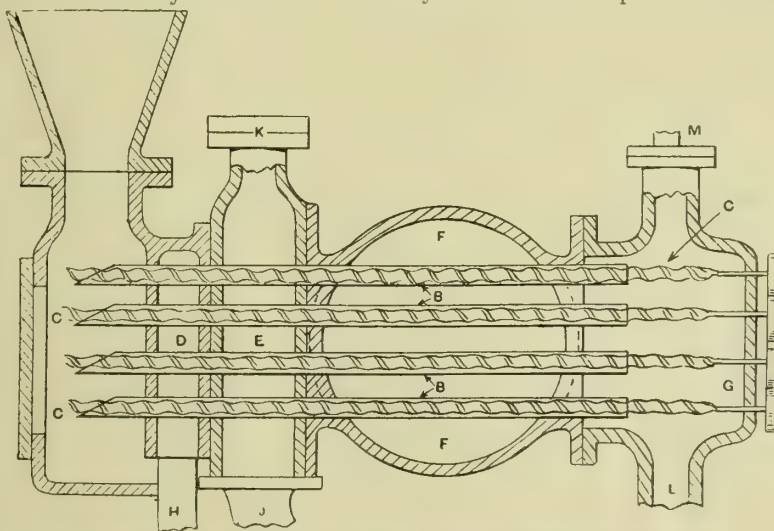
THE LOW COAL FEED GAS ENGINE. SECTION THROUGH GAS PRODUCER.
